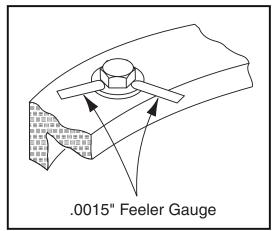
Swing Bearing Bolt Feeler Gauge Check
